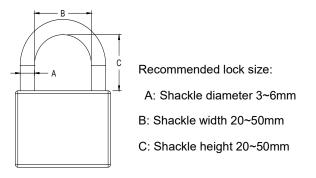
Acceptable Dimensions for Anti-Theft Padlock
